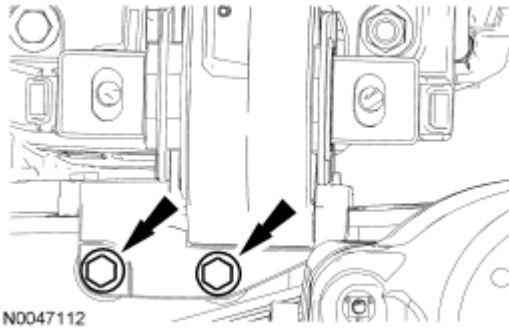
Identifying Transaxle Support Insulator Through Bolt
